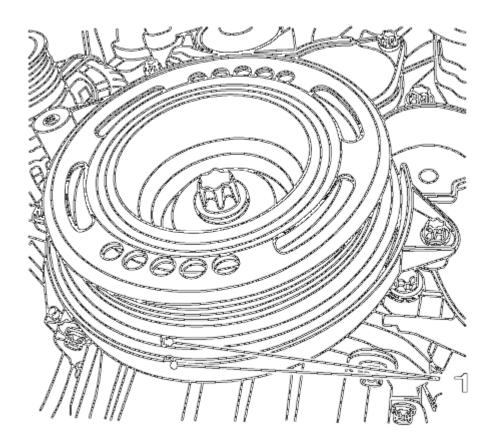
View Of Crankshaft TDC Position Courtesy of GENERAL MOTORS COMPANY
